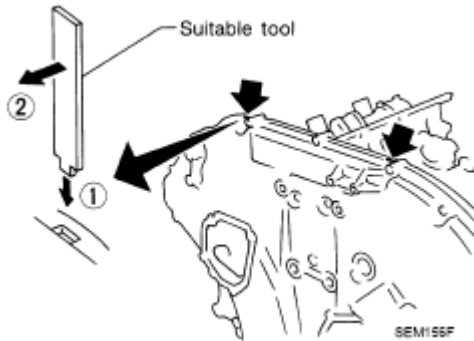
Removing Front Timing Chain Case Using Suitable Tool
